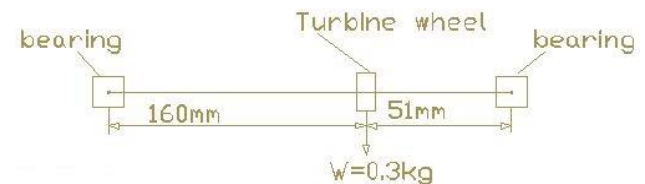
Schematic diagram of the turbine wheel mounted on the shaft
